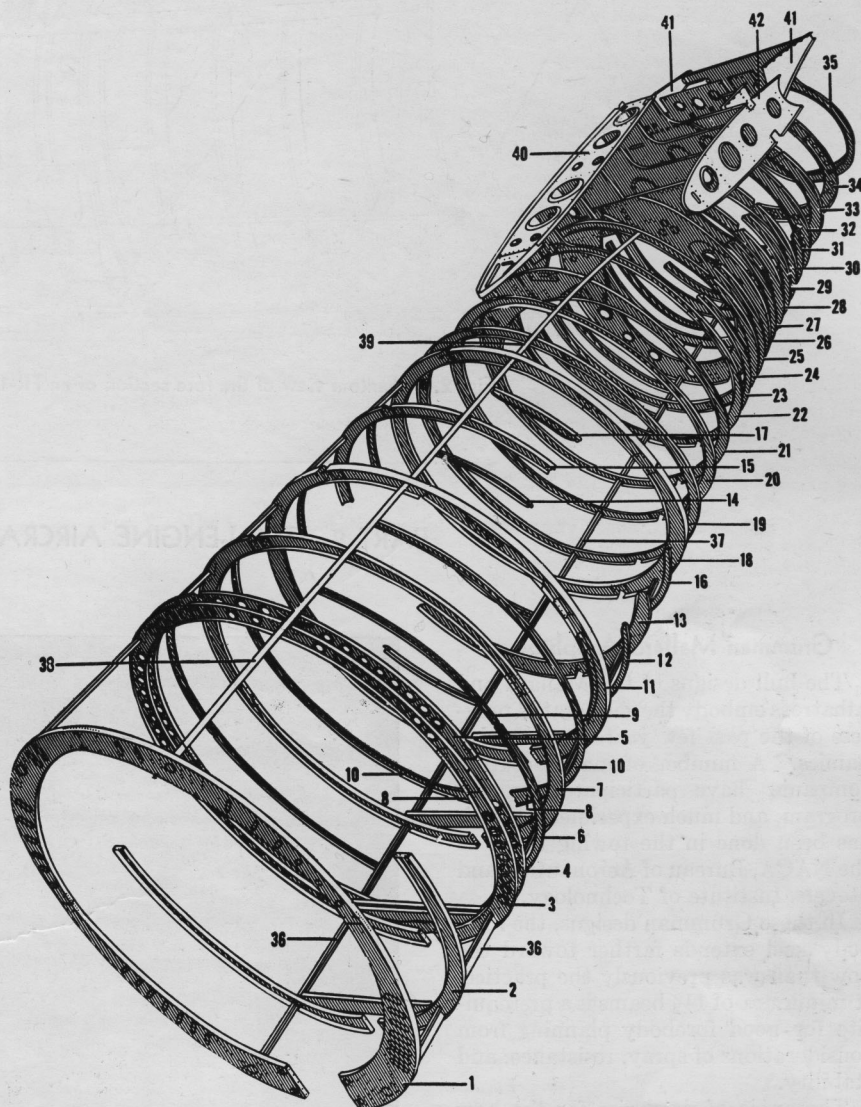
The aft fuselage of the FR-1 is a circular monocoque structure with empennage surfaces so mounted that there is no interference with the exhaust from GE I-16 turbojet engine which is mounted in the front part in which horizontal cross members can be seen between stringers.
